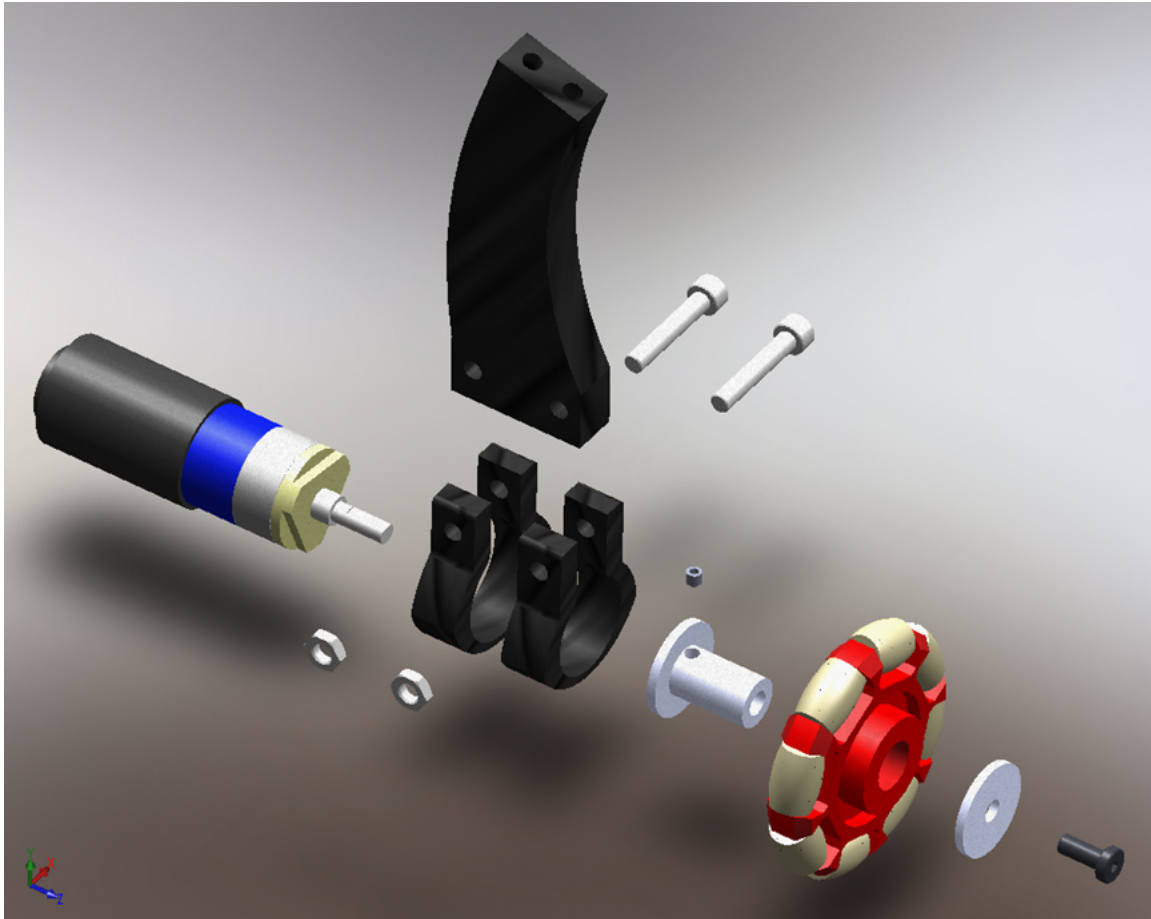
Vertigo 2.1 motor-encoder-wheel exploded subassembly (CAD).
